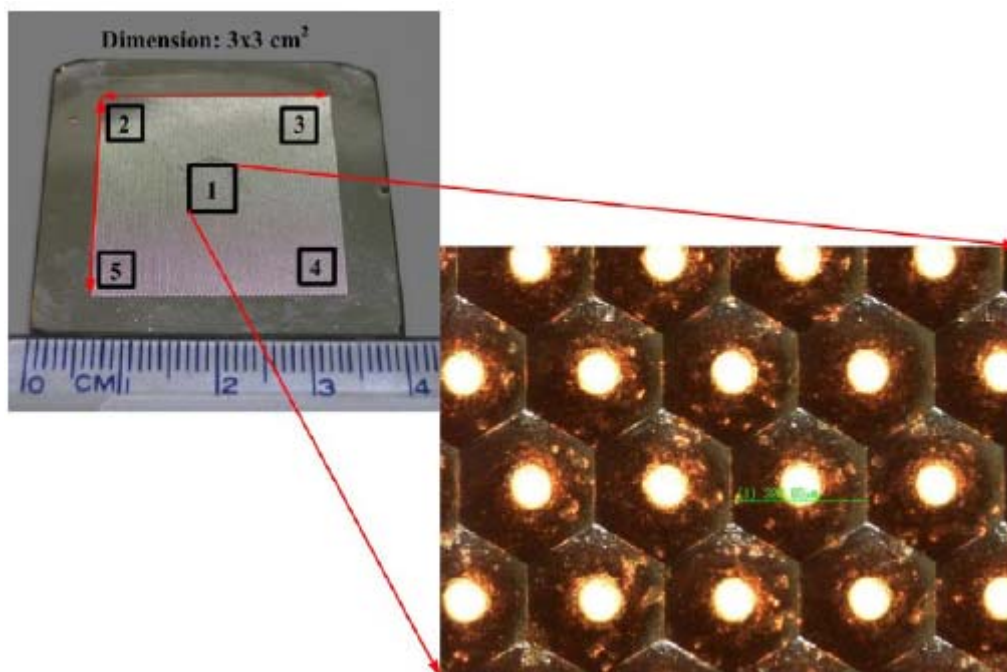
Ni-Co mold with gapless hexagonal micro-lens array. [92]
